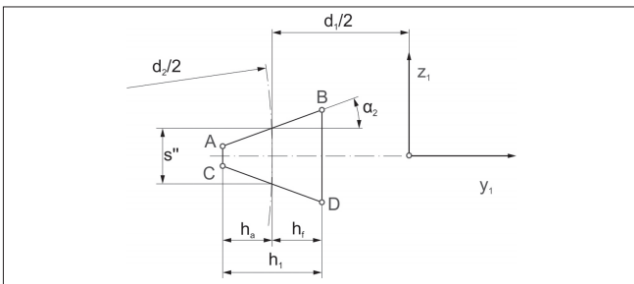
Fragment of the axial profile of the machining worm for defining the parametric equation of section AB or CD ; h_a – tooth addendum, h_f – tooth dedendum, h_1 – tool tooth height, s'' – tooth thickness, α_2 – tool tooth profile angle, d_2 – pitch diameter of wormwheel, d_1 – pitch diameter of machining worm
